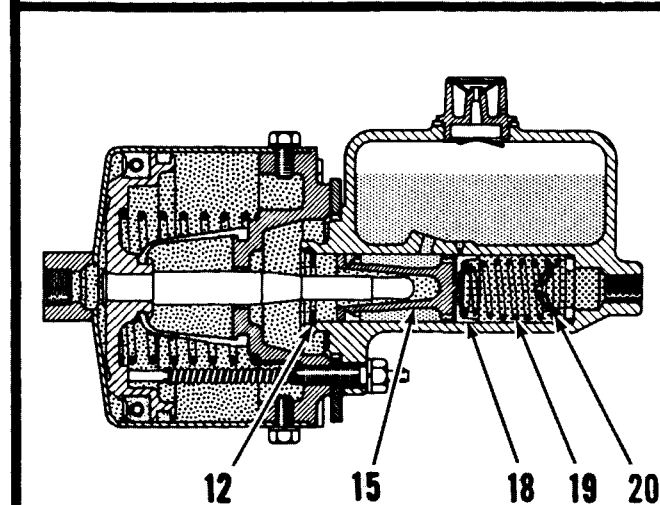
BYPASS CLOSED, CHECK VALVE OPEN.
